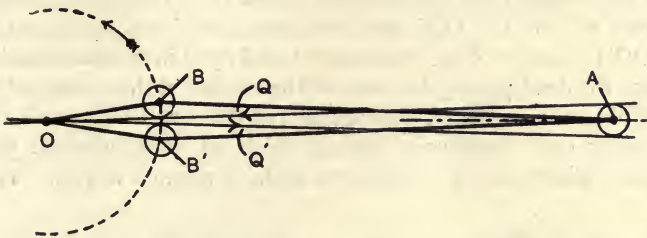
Angle of zero turning moment due to friction at the crank and crosshead pins ; inner dead point.
